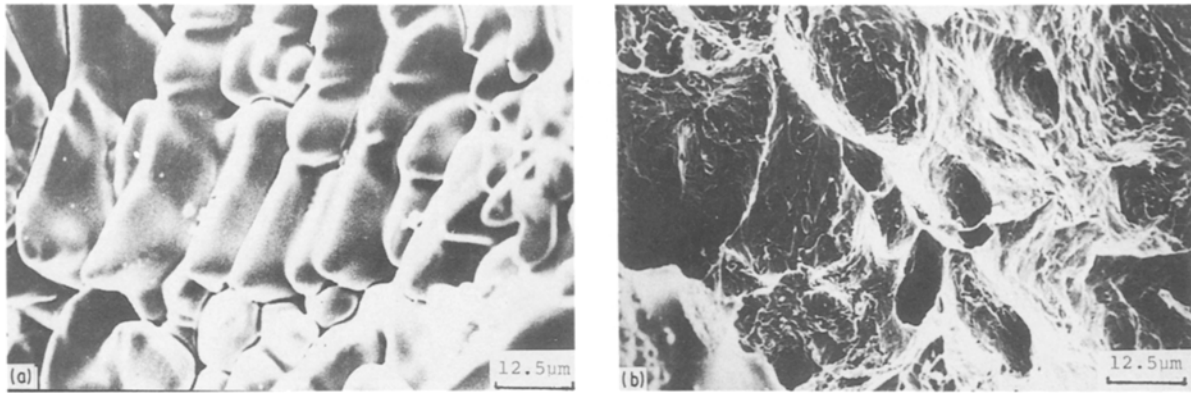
Typical fracture surfaces of the simulated austenitic stainless-steel weld metals observed in SEM. Steel 1, tested at (a) 1300 and (b) 1200 °C.
